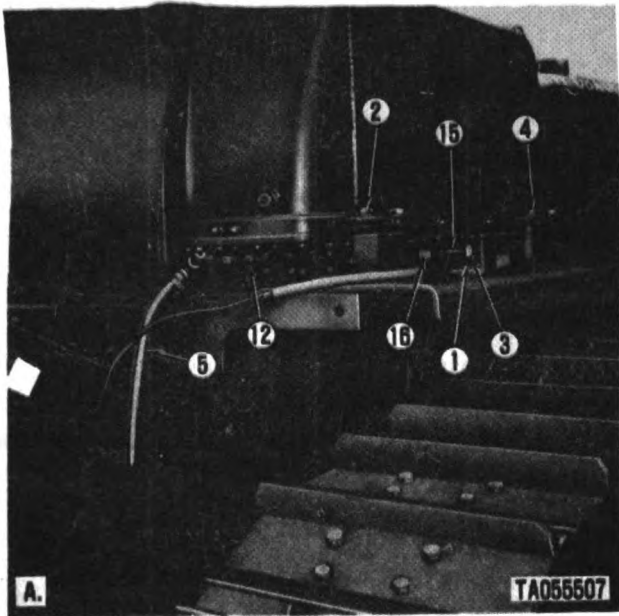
Hydraulic tank removal (w/ROPS).
